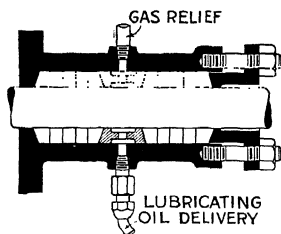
Overfeeding oil to single lantern introduces excess oil into compressor suction. (Courtesy Socony-Vacuum Oil Co.)
